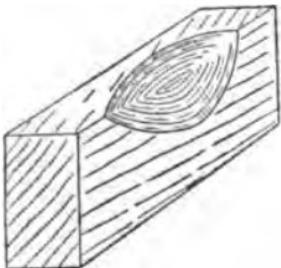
Half of Wooden Mould, showing hollow, for casting boat-shaped leads.
